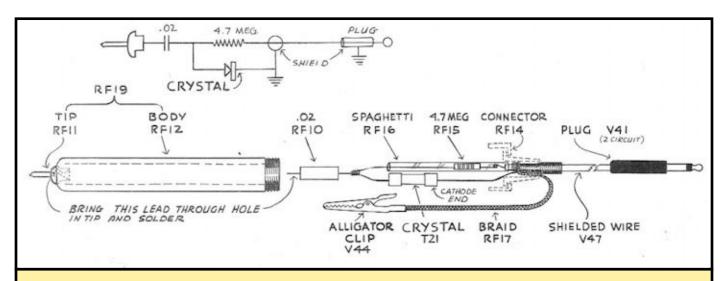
Schematic and assembly drawing of the early #309 probe using the early style probe housing. Part numbers are given in the old Heathkit part # scheme. See HOM #95, page 4 for brief details.
